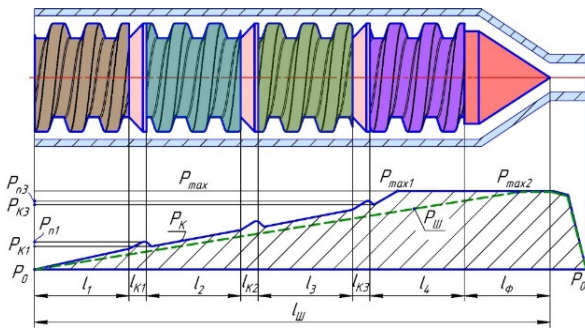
Pressure variation in the extruder with and without conical compression rings.
